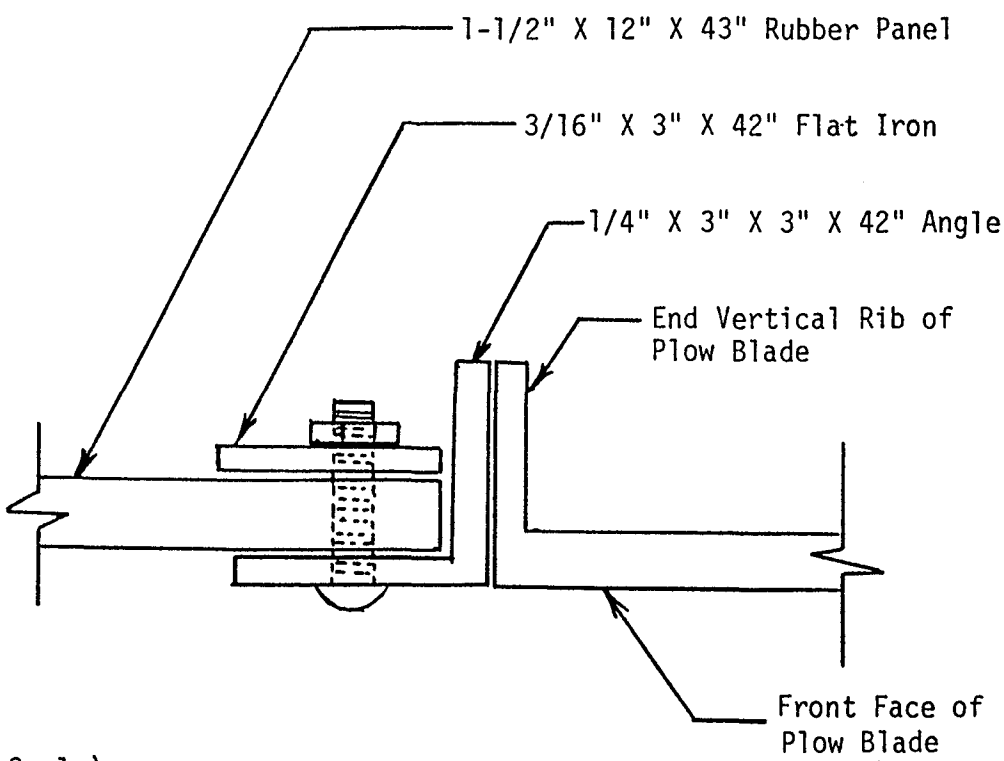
Cross Section of Plow Blade with Rubber Panel Assembly Attachment
